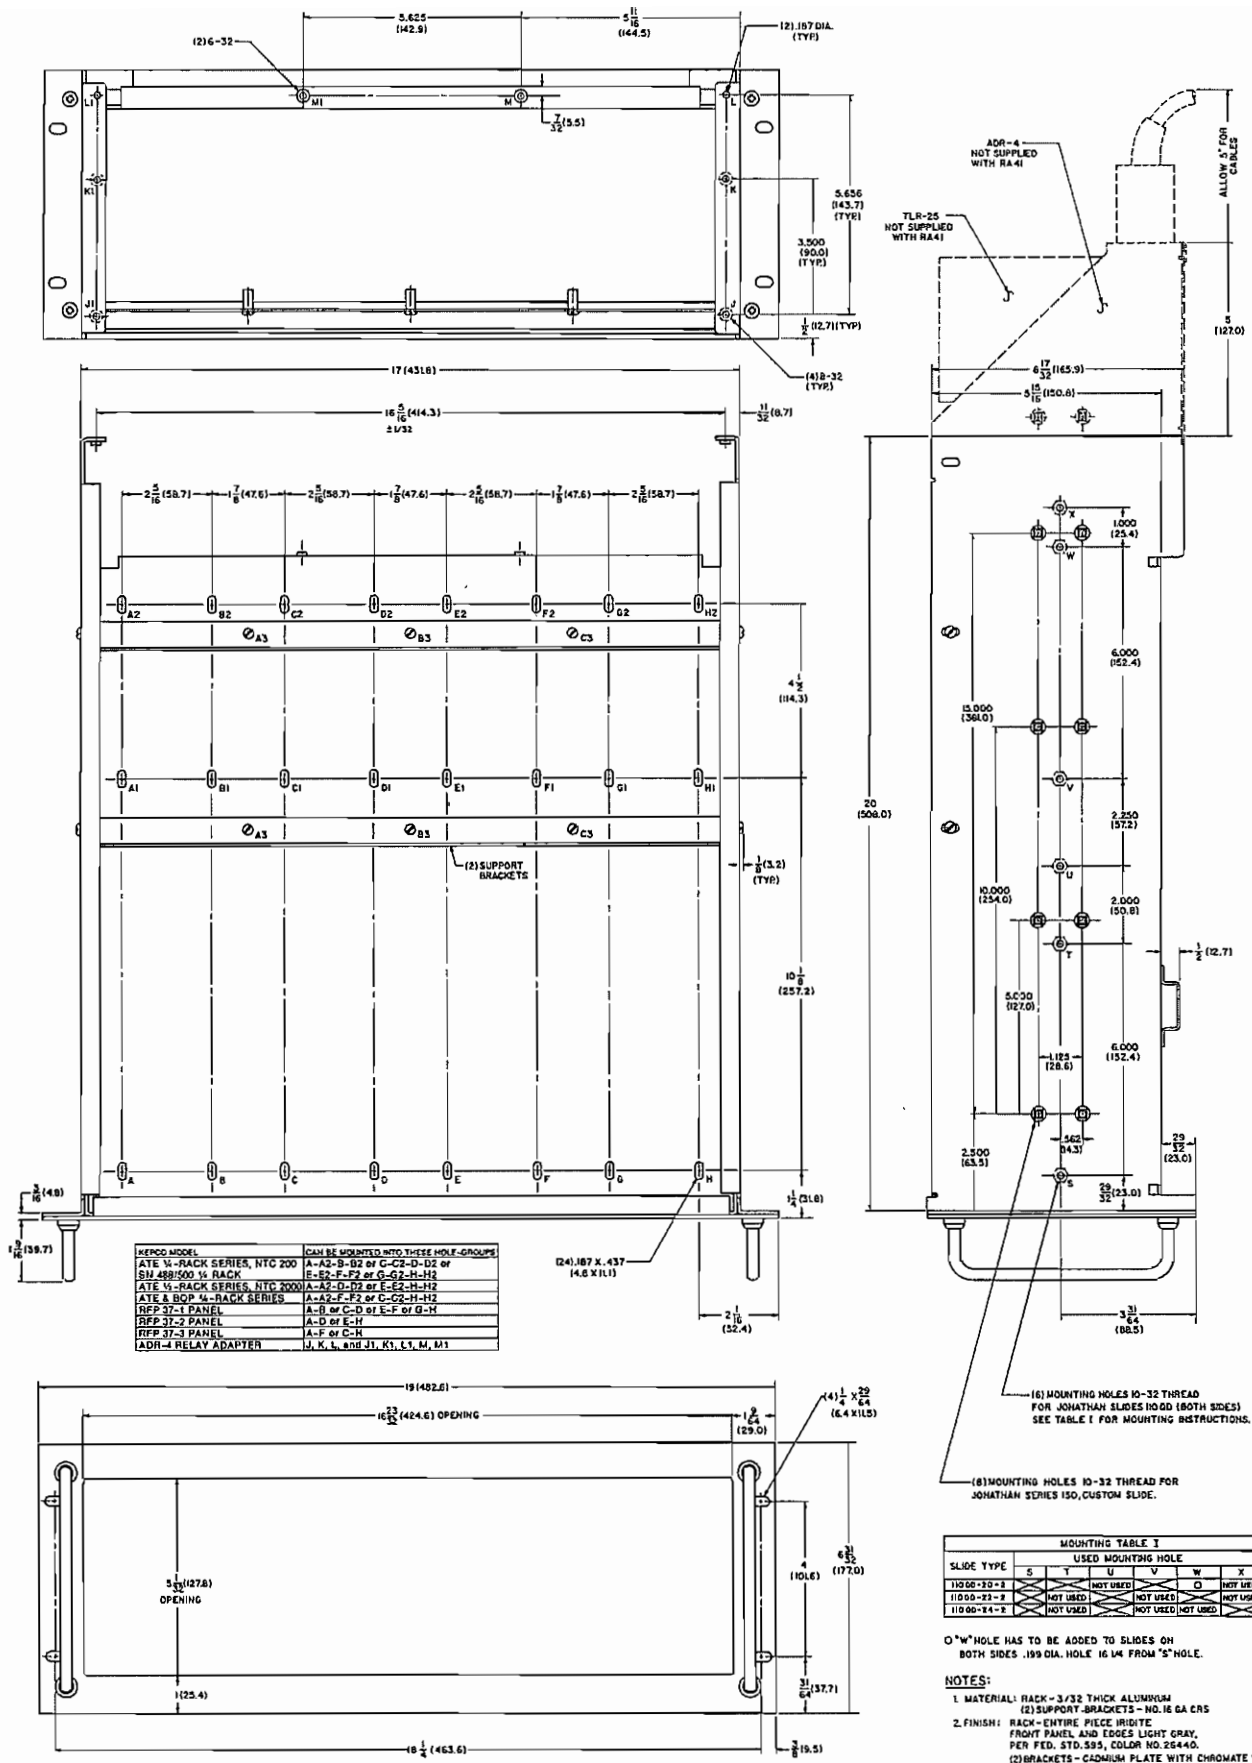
MECHANICAL OUTLINE DRAWING, KEPCO MODEL RA-41 RACK ADAPTER.
